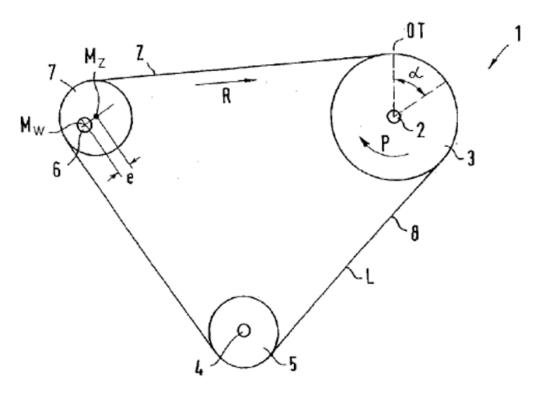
illustrates a belt-type transmission having a pulley (7) which is eccentrically mounted.
